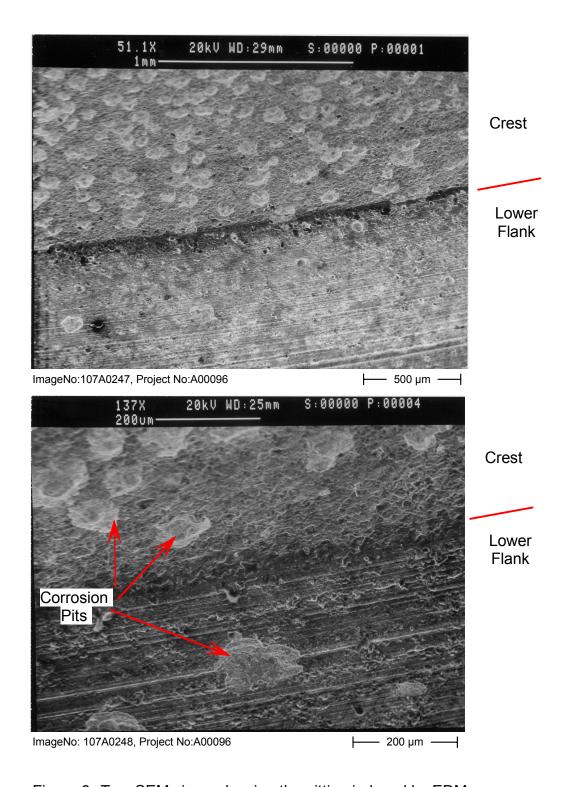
Two SEM views showing the pitting induced by EDM cutting and the lack of a burr at the lower thread flank to crest interface on the threads of nut DCA110(a).
